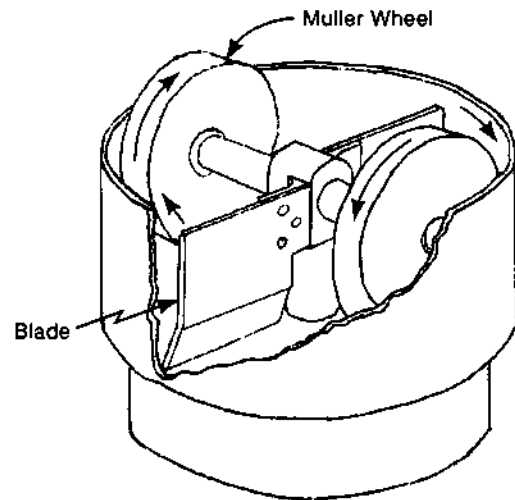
B6a A typical batch-type sand muller. Both the muller wheels and blades move and mix the sand, binder, and other ingredients.
